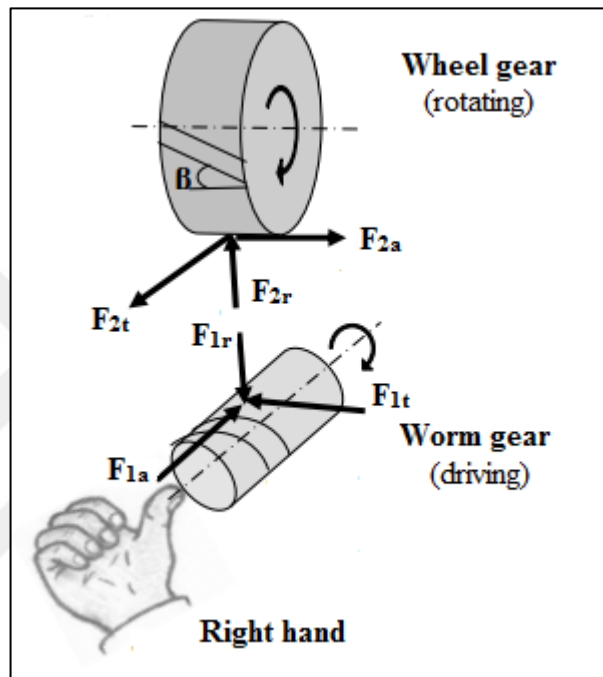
Tooth forces acting on worm gearbox (Dündar, 2013)
